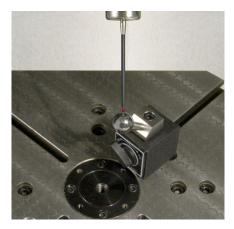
A machine tool probe measuring an AxiSet™ sphere in order to check rotary axis pivot points
